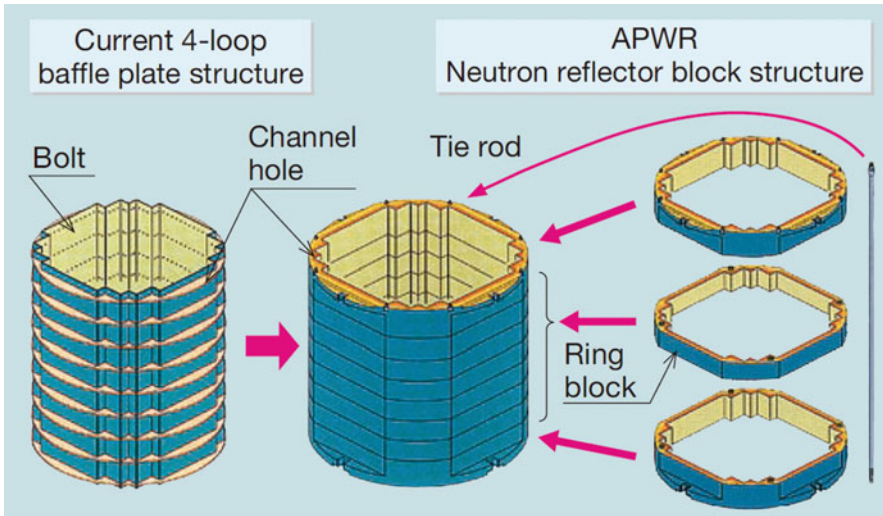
The neutron reflector for the APWR consists of rings without weld lines and with only a few bolt connections
